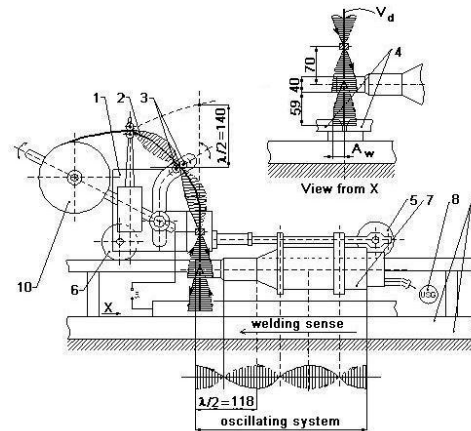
Scheme of the experimental installation for submerged arc welding: 1 – welding tractor; 2 – electrode wire; 3 – reflectors of ultrasonic energy; 4 – sheet pieces to be welded; 5, 6 – rolls for guidance/displacement of the assembly welding tractor-OS; 7 – magnetostrictive transducer type P.M.S. 15A-18; 8 – ultrasonics generator; 9 – resistance frame; 10 – holder of the electrode wire; ——— progressive wave; - - - - regressive wave..
